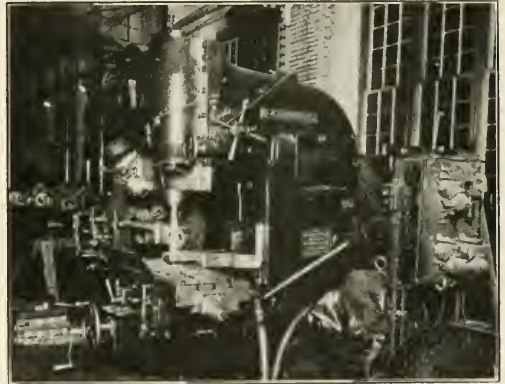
Powerful Knee-Type Milling Machine Truing Main Rod Jaw
